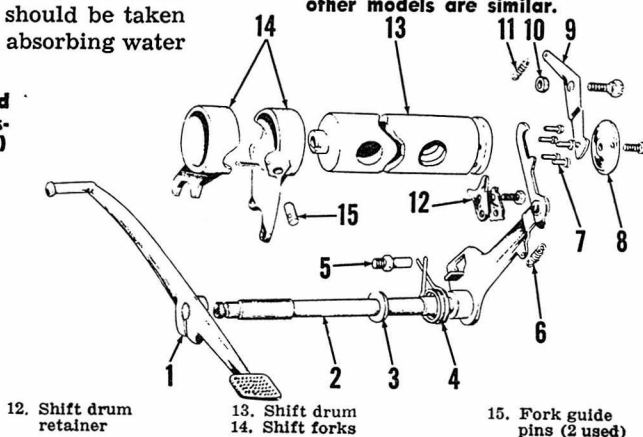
View of gear shift assembly installed. Model shown is 100 GP, however other models are similar.
